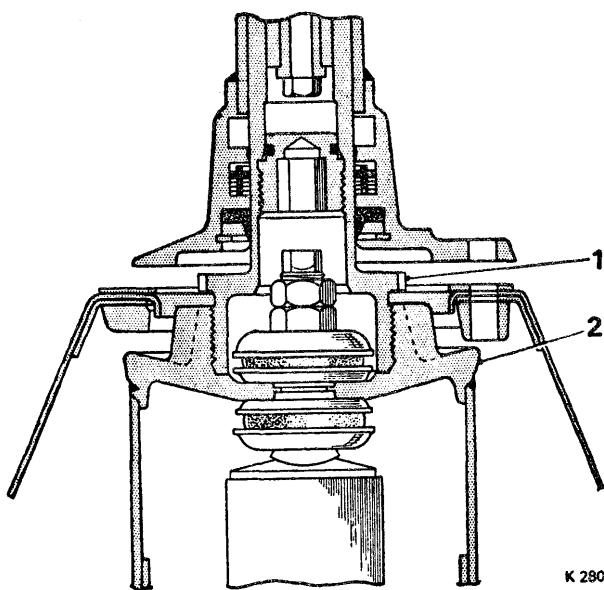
SECTIONAL VIEW—LATER LOCKING ARRANGEMENT—REAR RAM PISTON TO ROAD SPRING ISOLATOR
